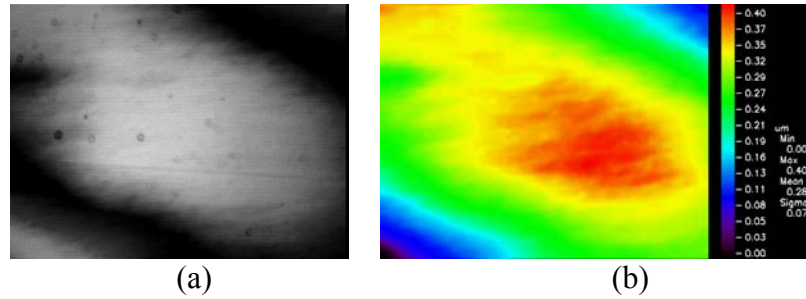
Measurement of flatness: (a) OEH fringe pattern corresponding to flatness (i.e., initial deformation) of the workpiece, before the laser microwelds were made, (b) 2D deformation of the workpiece corresponding to the OEH fringe pattern of (a).
